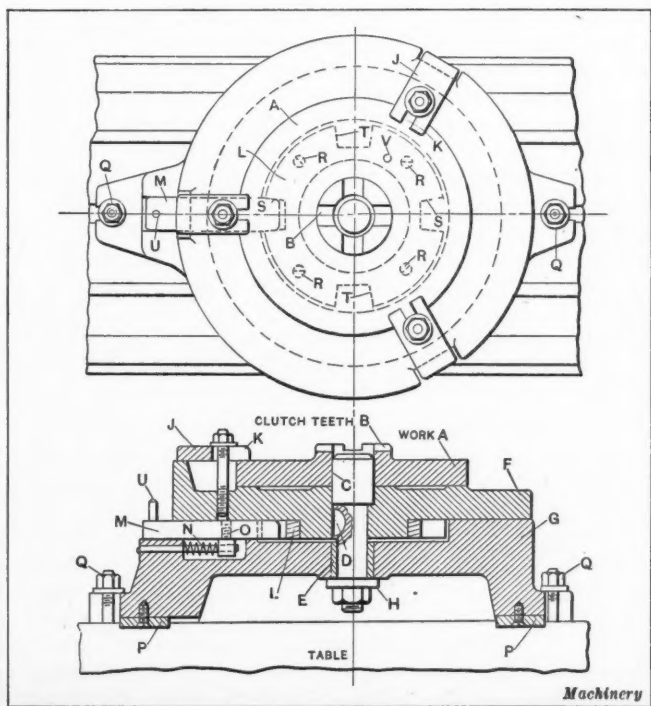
Indexing Fixture used for milling Teeth in Clutch Gear
